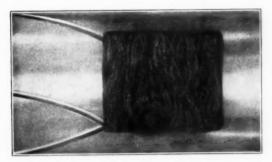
Cross section of a down feed motor bearing showing method of packing.
